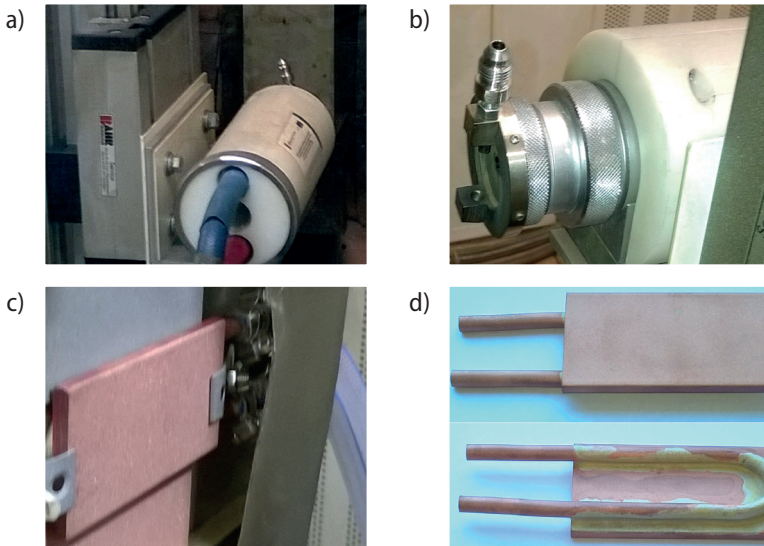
Plasma-spray deposition on water-cooled copper plate: a); b) plasma torch; c) copper plate mounted on a moving table; d) substrate: copper plate and copper U-shaped pipe soldered using Ag-base solder
